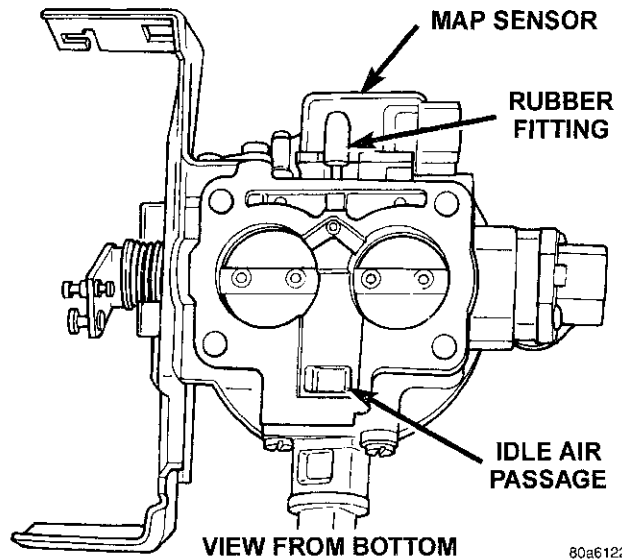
Rubber L-Shaped Fitting—MAP Sensor-to-Throttle Body—3.9L/5.2L/5.9L Engines
